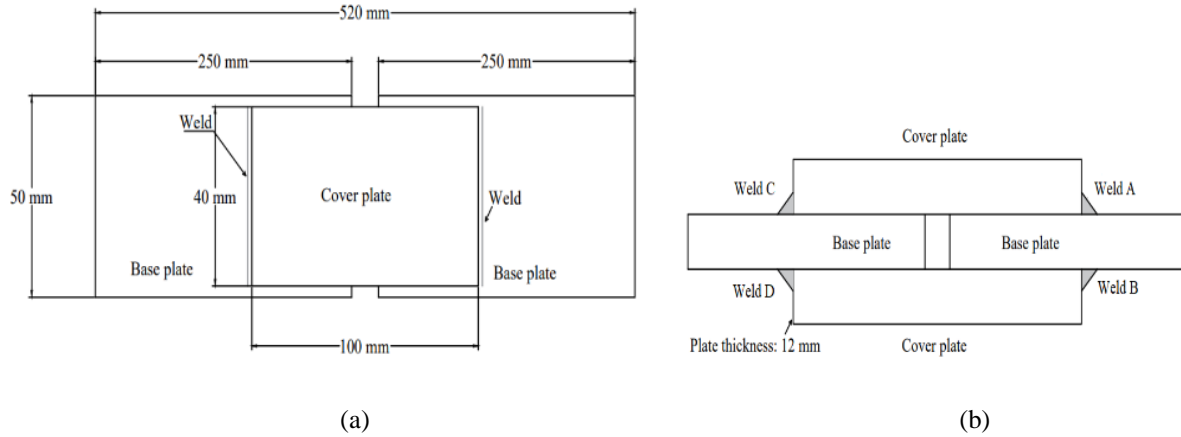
Transverse fillet lap-welded specimen (a) Plan view, and (b) Section.
